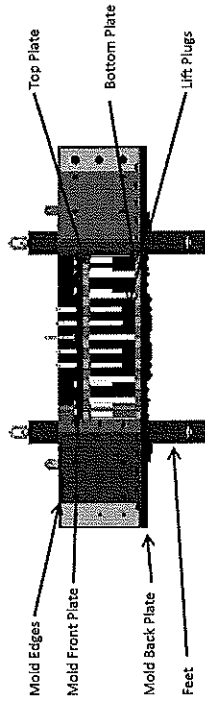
TOP VIEW OF THE CORE BLOCK MOLD.
